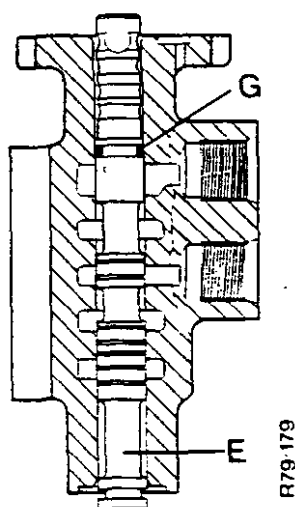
ASSEMBLY OF THE THREE-WAY VALVE
